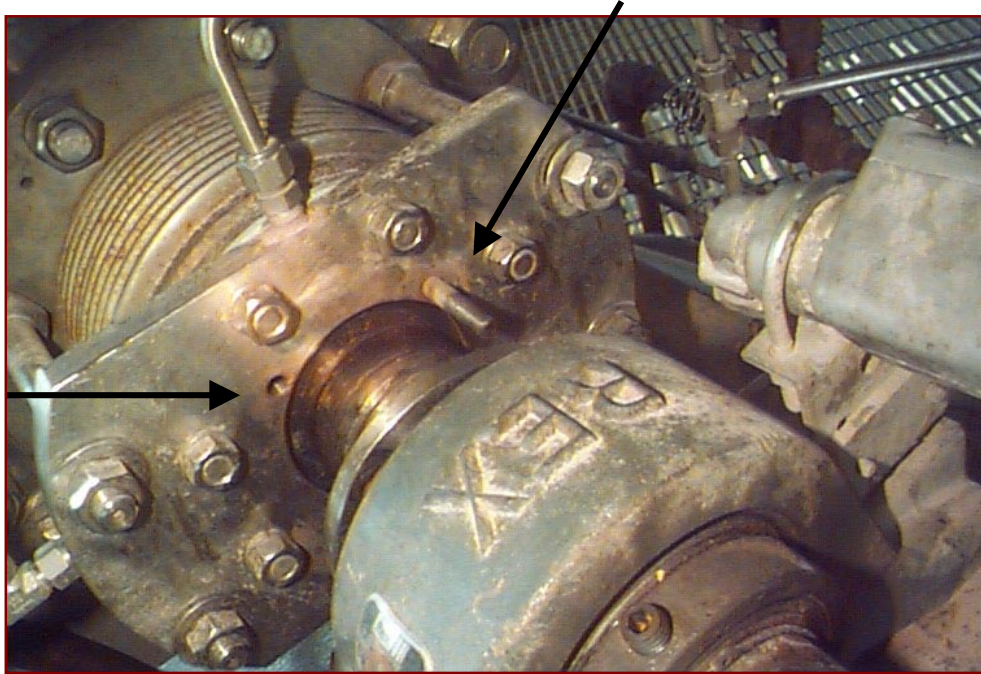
Drive-Side Seal Packing Follower (Four-Bolt)
